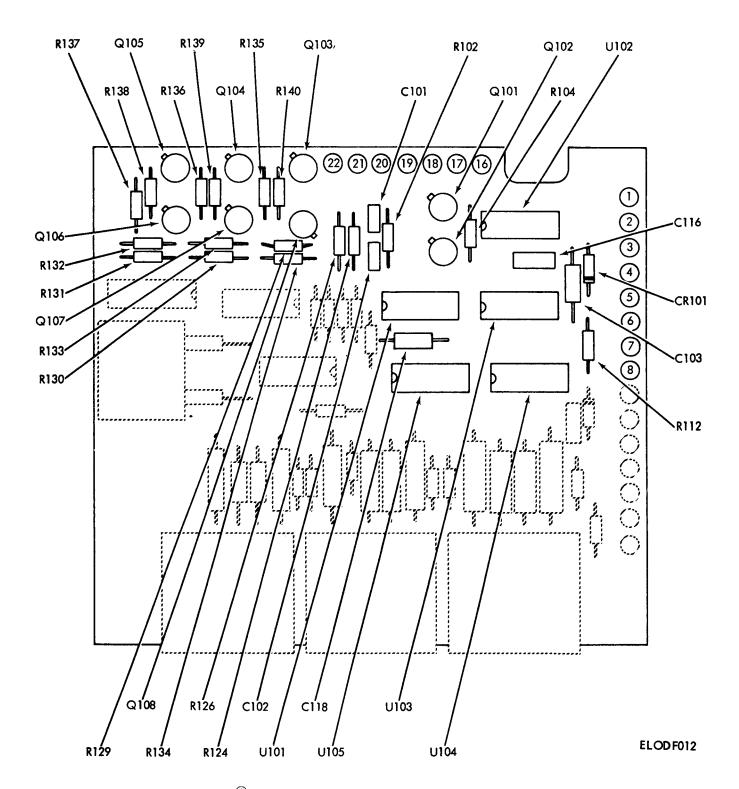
\bigcirc Oscillator printed circuit board assembly (A1) (sheet 1 of 2).
